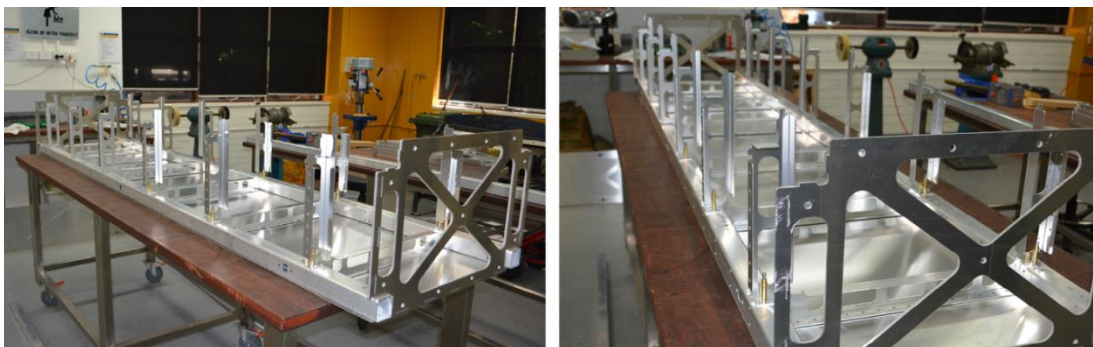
Shows the assembly of the implement unit box section with the bottom cross spans in place, along with the U-shaped bulkheads and the 5mm end braces.
